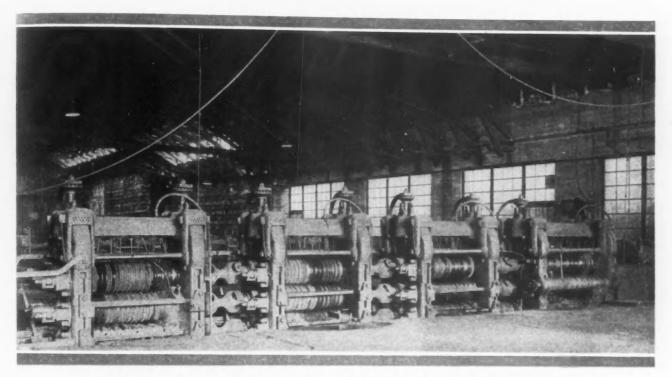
Three-High 18-In. Rolling Mill with SKF Roller Bearings
